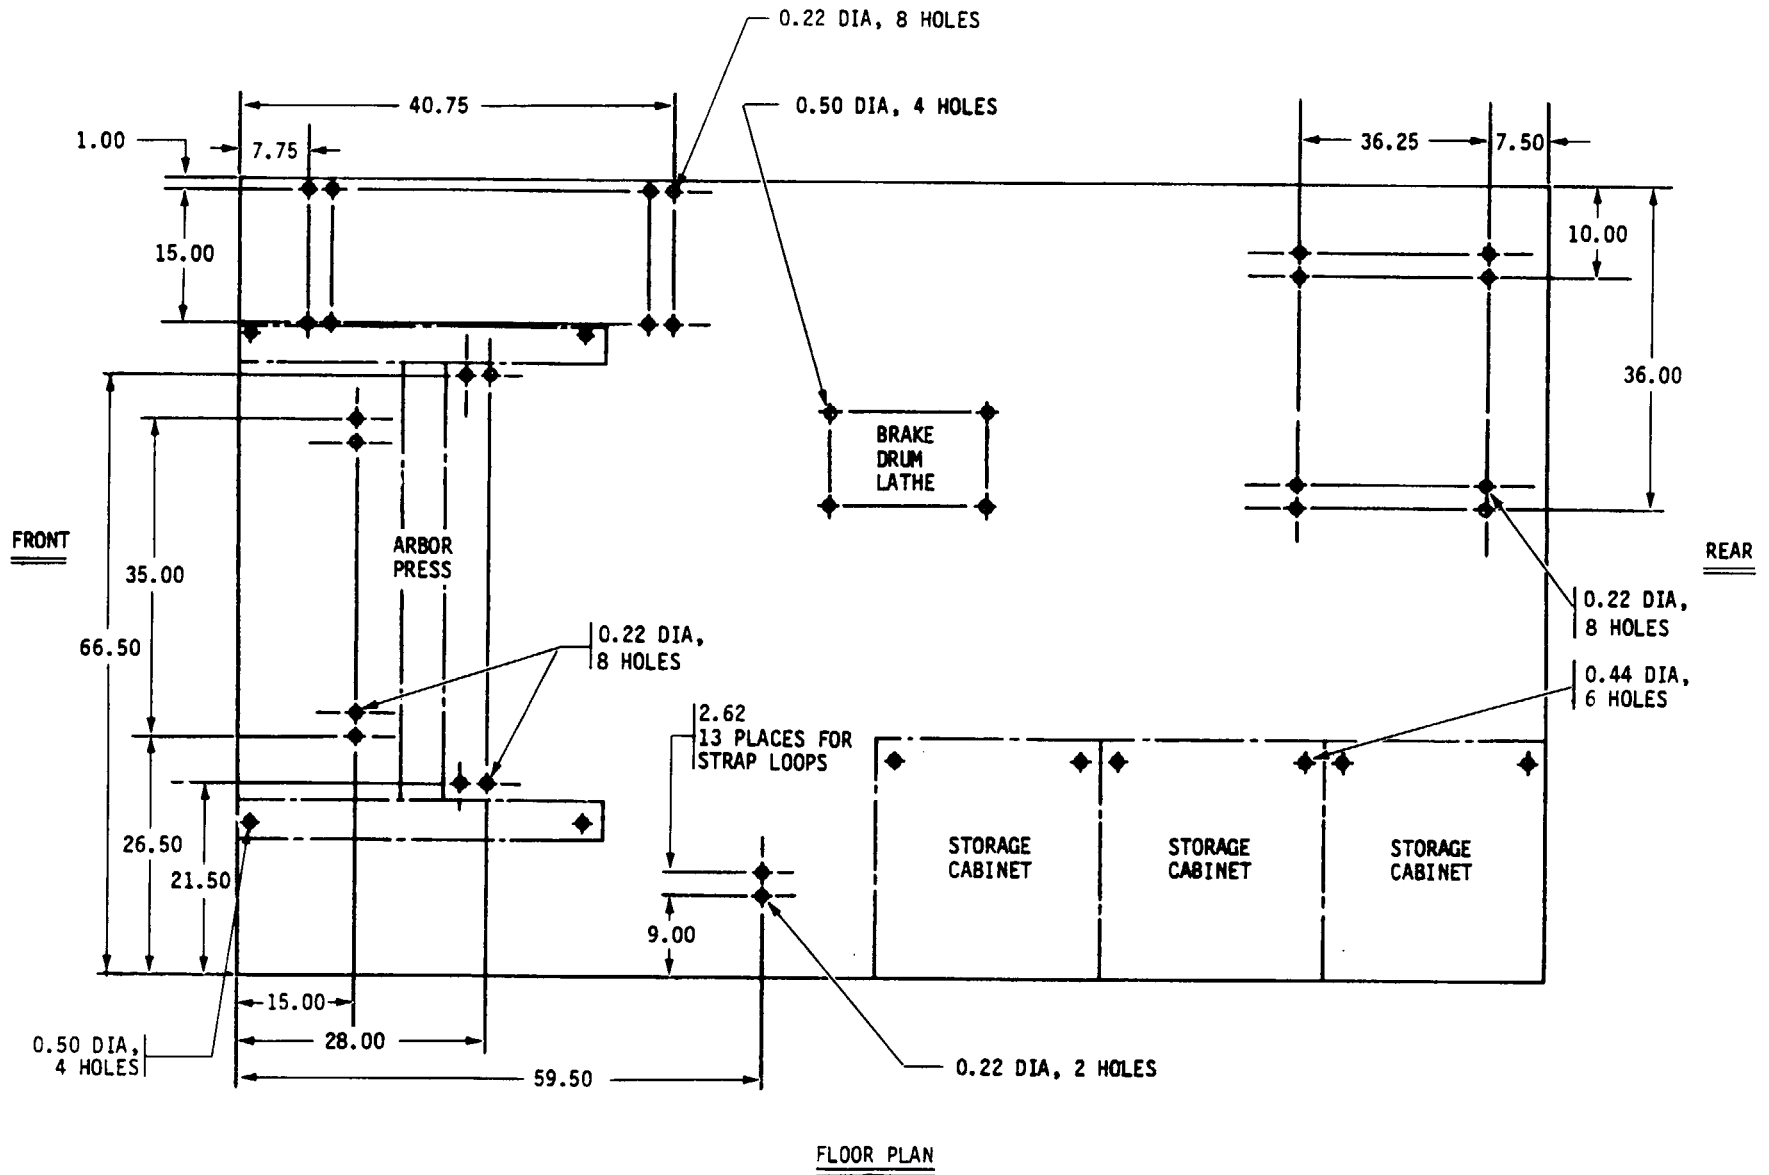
Hole Dimensions for Mounting Holes and Strap Loops, Unit 2, M35A2, Floor Plan.
